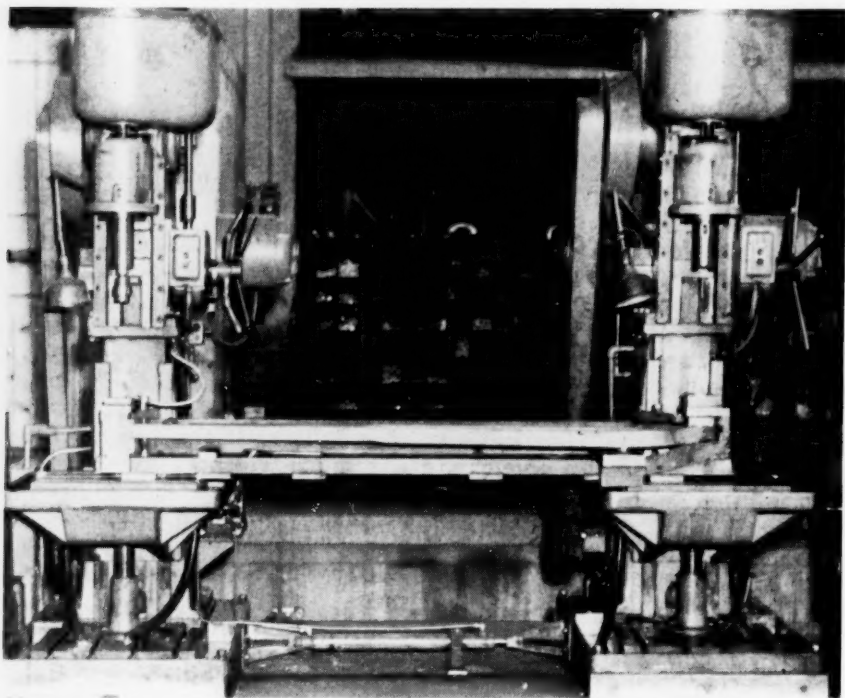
The drill jig, loaded with the workpiece, is shown in position. The cylinder is not quite long enough to reach from machine to machine; gusseted brackets on both ends provide anchorages for the cylinder and piston rod.
